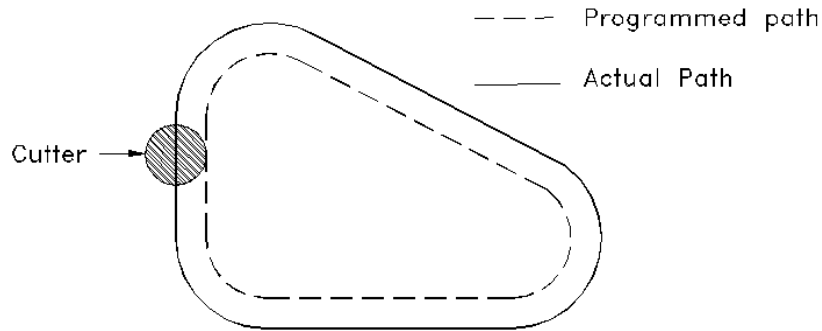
Radius Compensation for a Programmed Tool Path
